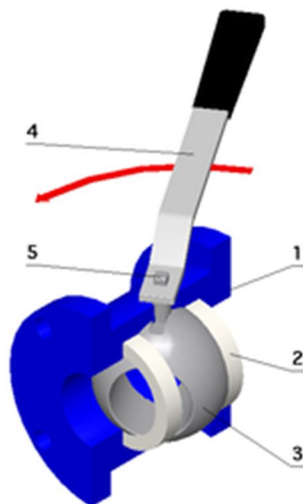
Cut-away view of ball valve components: 1) body 2) seat 3) floating ball 4) lever handle 5) stem
